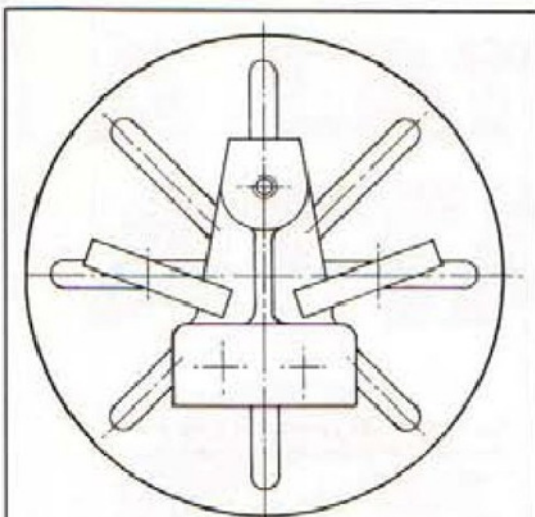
Bolt from back of face plate. Clamp machined face to lathe face plate and machine front face parallel to back face
